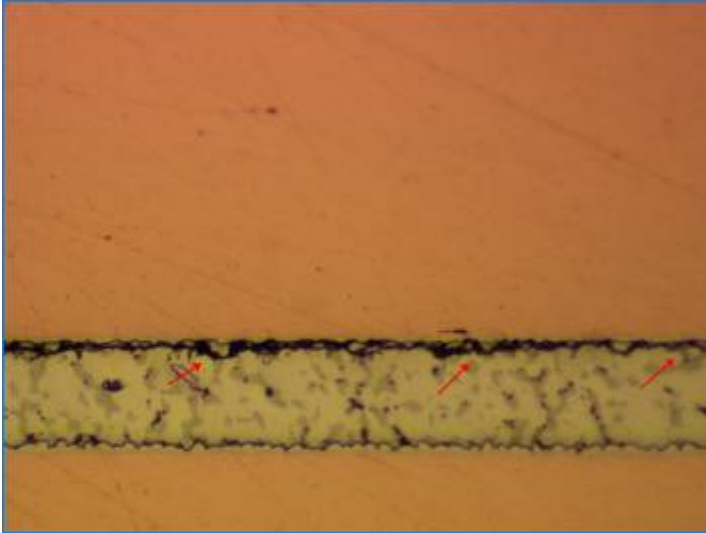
cross section, SN79, U28, left lead solder crack, 400xb
